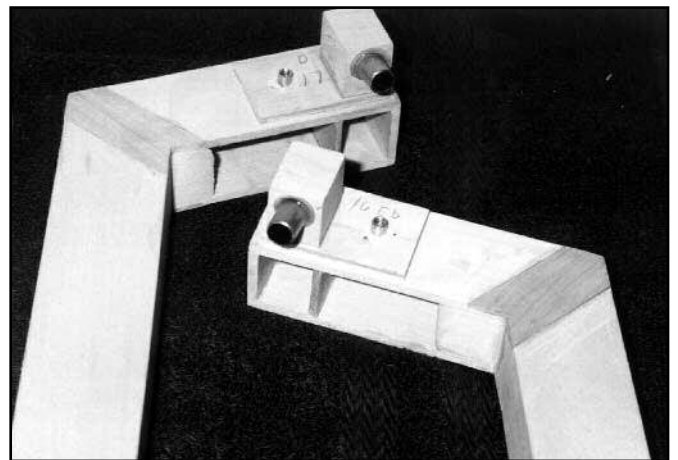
Technique of mounting the two largest accompaniment pipes on the front panel of the organ.
